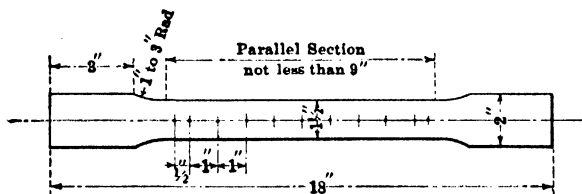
Standard test piece of 8 ins. gaged length, piece to be of same thickness as plate.
